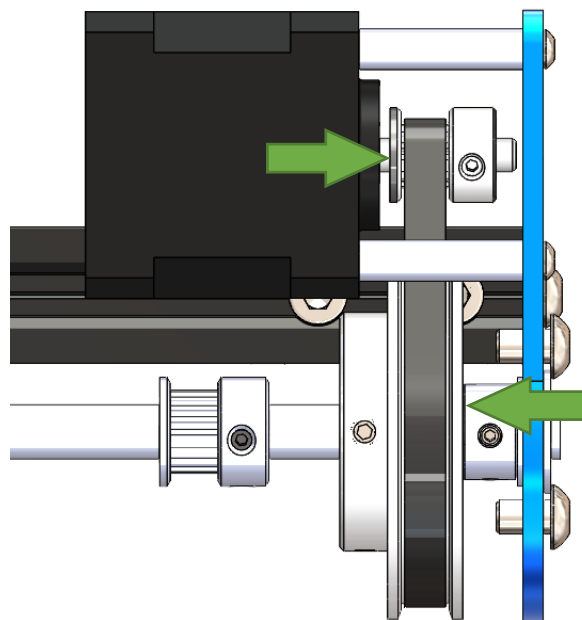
Top view of motor mounting, pulleys and closed belt has to be perfectly aligned.
